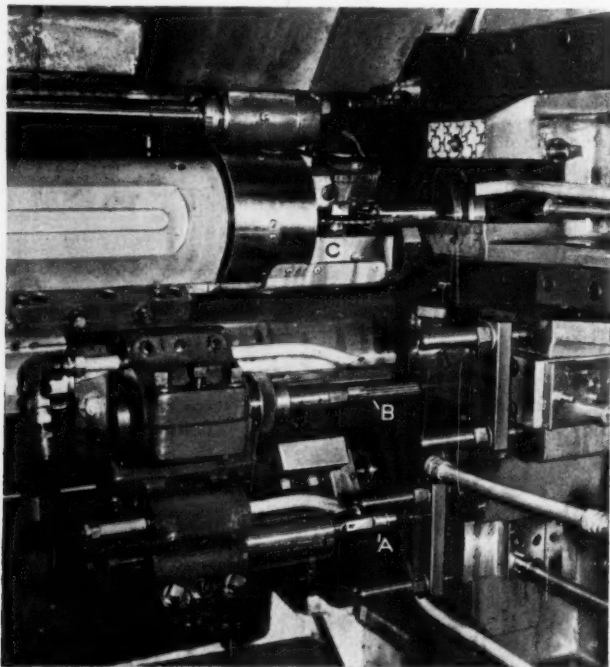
Close-up View of the 3½-in. Conomatic Machine Set Up for Machining a Striking Pin Lever. The Milling Attachment for Cutting a Slot is Shown at C
